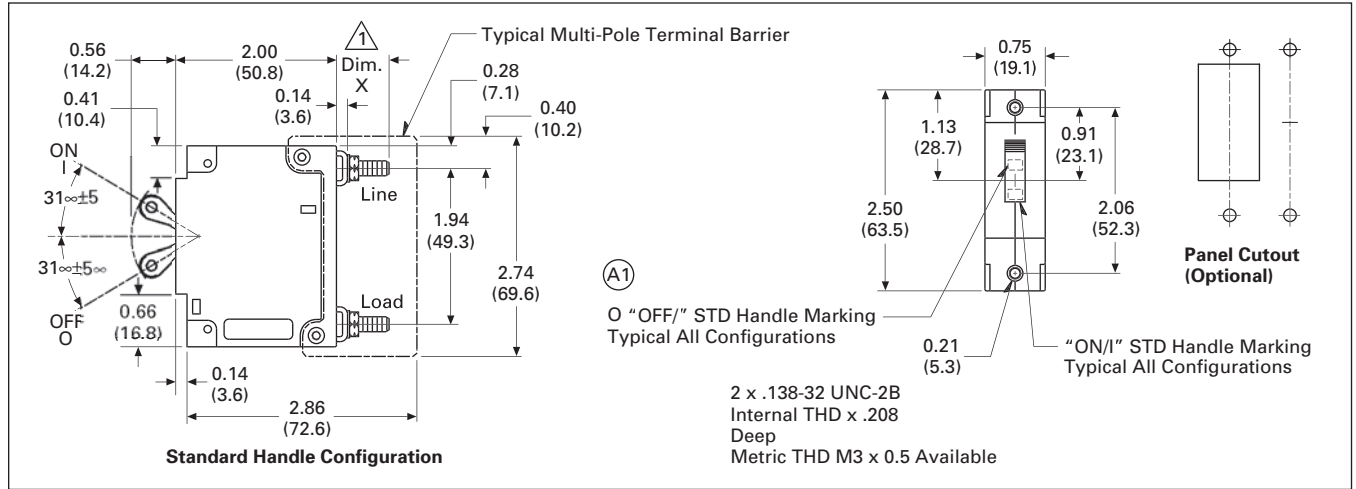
AMR Handle Configuration and Typical Dimensions
